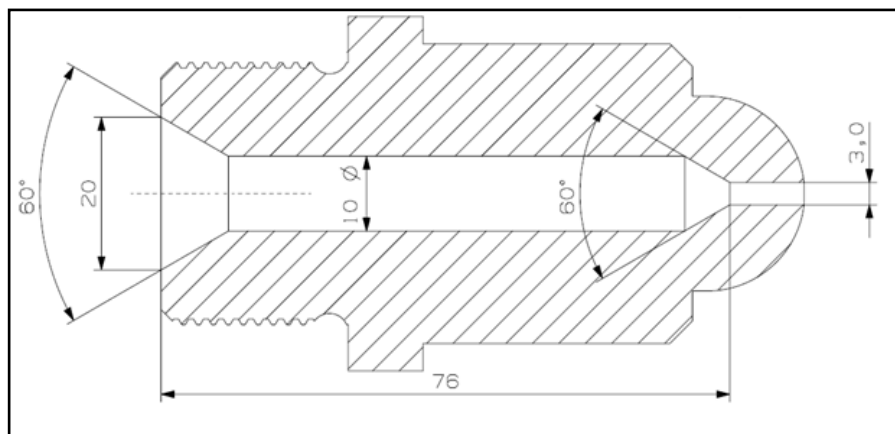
Cross-section drawing of 3.0 mm diameter nozzle
